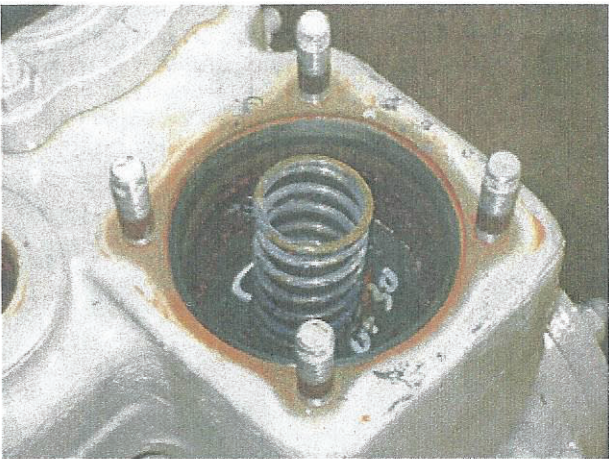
The valve cover has been removed showing the valve and valve spring.
